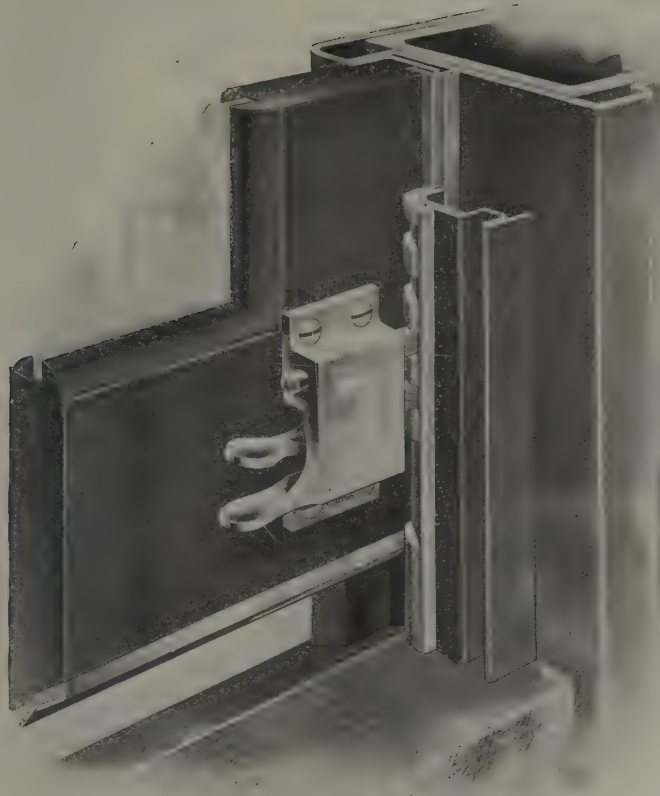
Edwards No. 7 Lock and Brass Bar with Metal Stop Casing and Side and Bottom Weather Stripping, Used on Steel Cars, Unbalanced Sash.
